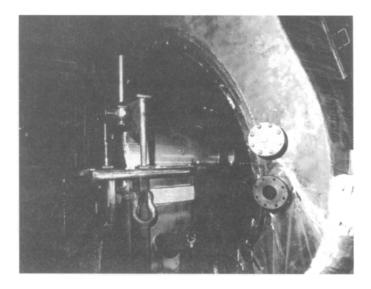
This view shows the conical stainless-steel backup plate closing the exhaust casing. The two flanged connections on the right are for the rotor blade viewing ports. The bearing housing is shielded from the backup plate by 3.5 in. (90 mm) of insulation.
